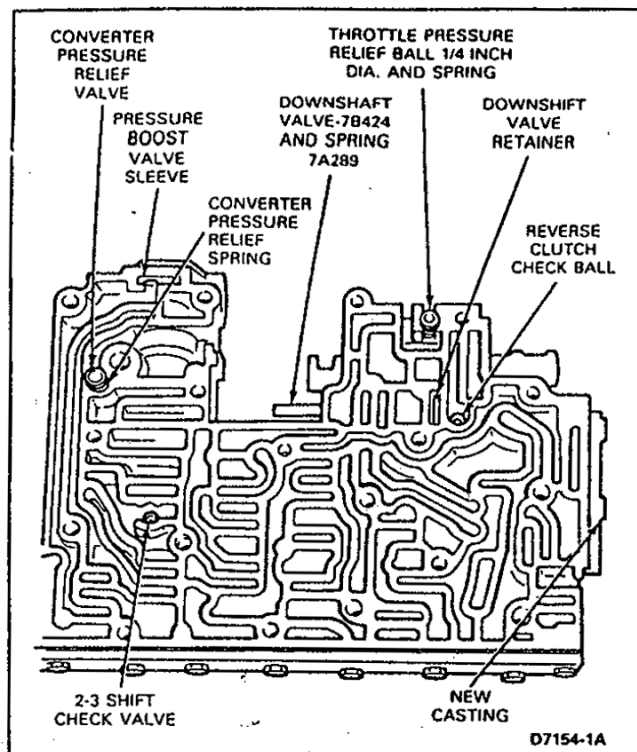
Downshift Valve and Spring, Converter Pressure Relief Valve, Throttle Pressure Relief Valve Check Ball, and 2-3 Shift Check Valve Locations
